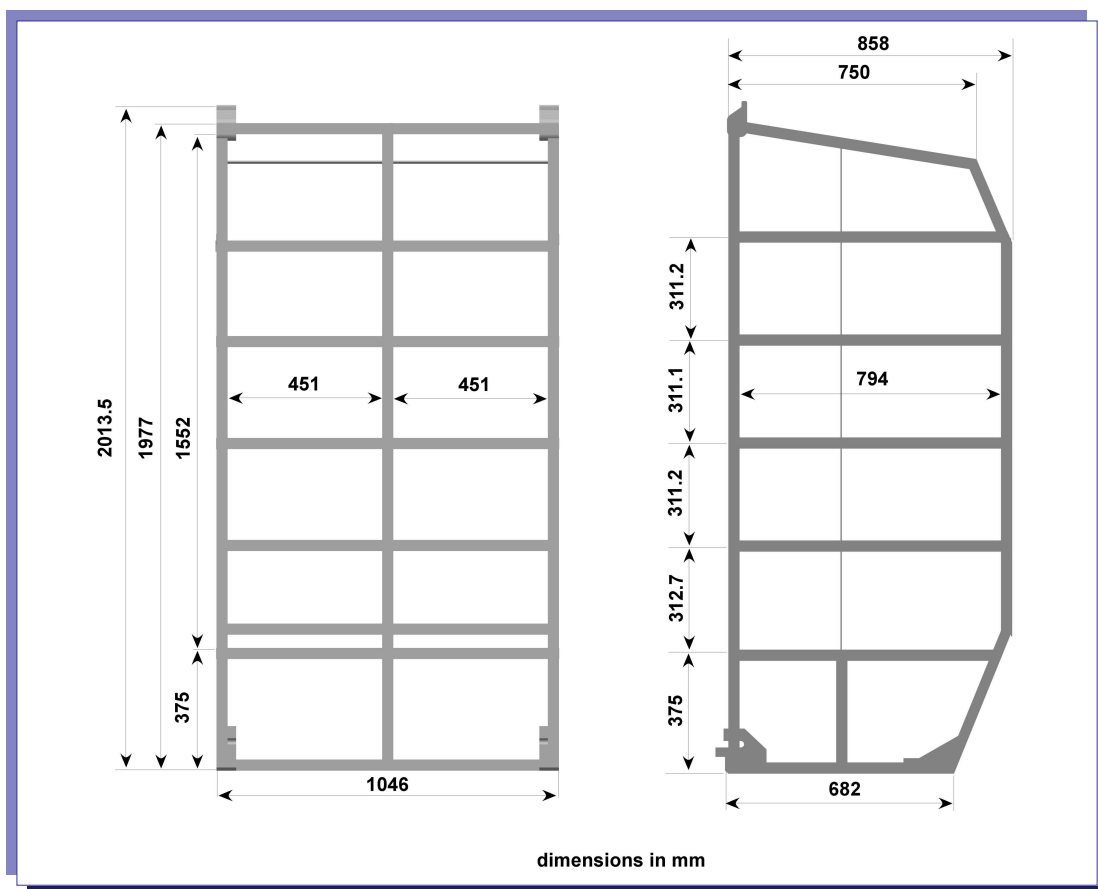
ISPR 6-post configuration dimensions – Front and Side View
